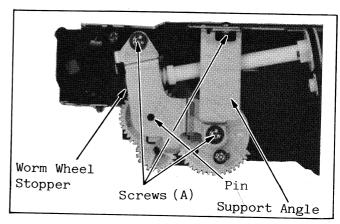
Adjustment of Cassette Up Gears-(5)
